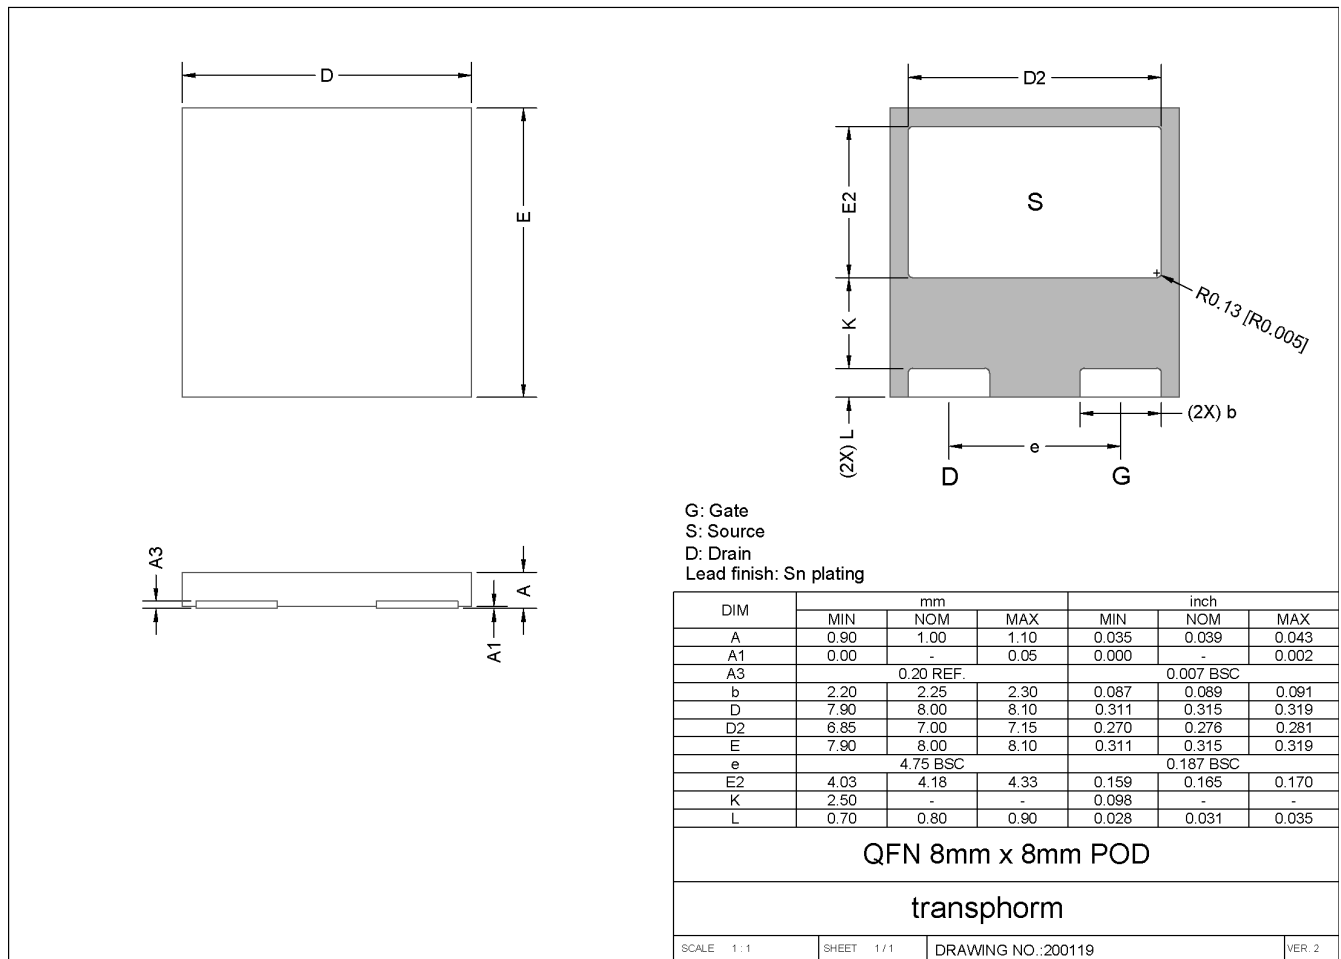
Package Outline Drawing – 8 × 8 mm PQFN
